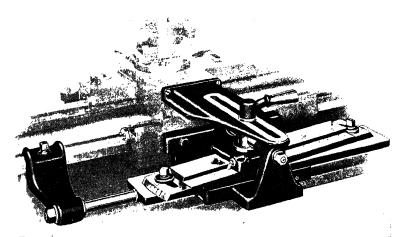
Lathe taper attachment. For long tapers the cross slide is unlatched from its driving screw and clamped to the taper attachment. The taper attachment is set for the desired taper, and as the carriage moves up and down the ways the cross-slide, and hence the cutting tool, is moved in and out, generating the taper. (South Bend Lathe Works.)
